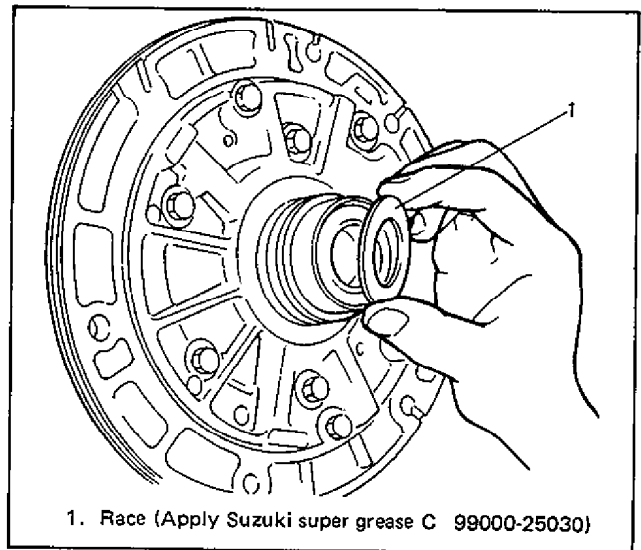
B-220 Installing Another Input Shaft Bearing Race
